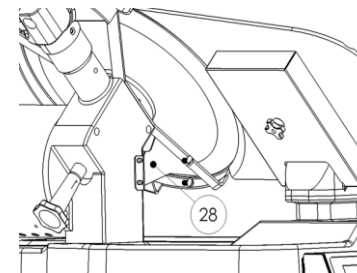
DISASSEMBLY SLICE DEFLECTOR
